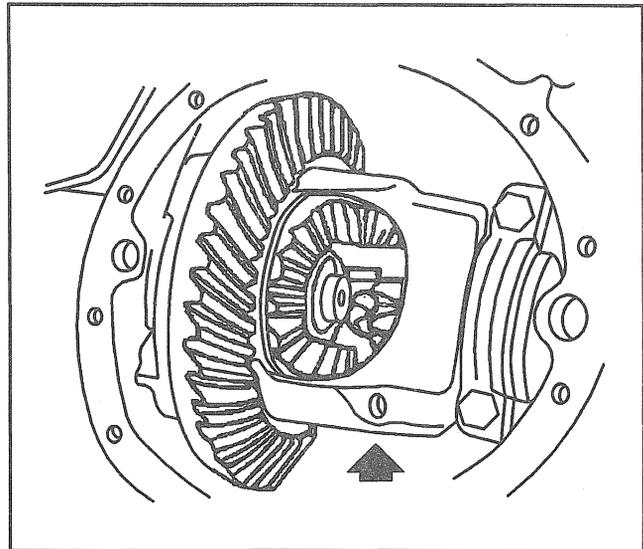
"C" Lock and Axle Shaft Seated In The Side Gear
